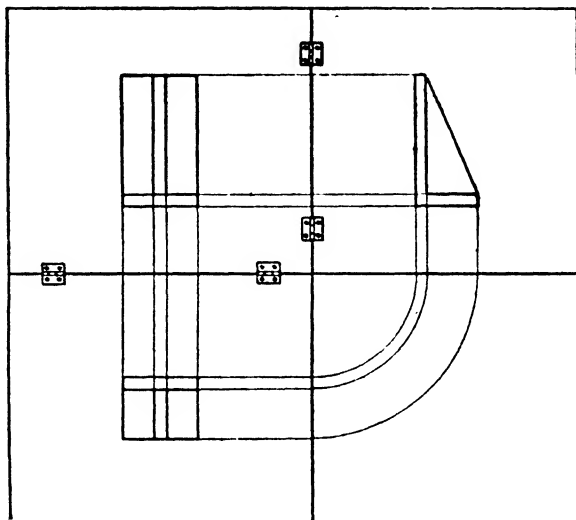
VIEWS OF BRACKET OBTAINED WHEN PLANES HAVE BEEN OPENED OUT
